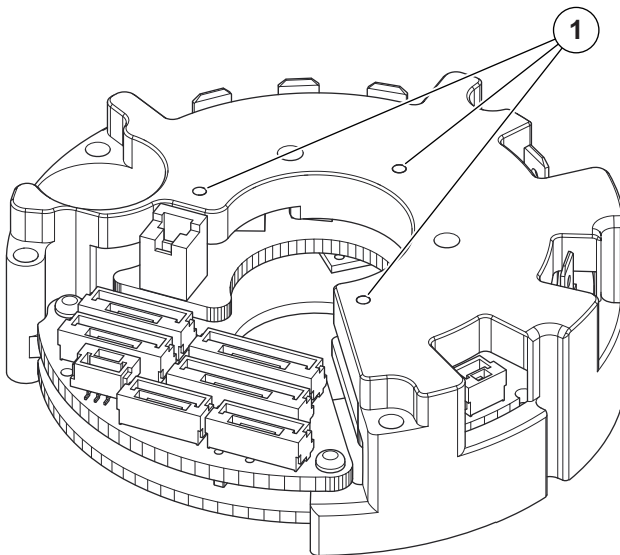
Threaded holes on the TUAKA DRIVE (example illustration)
